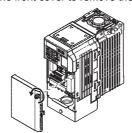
Remove the Front Cover on an IP20/NEMA Type 1 Drive
